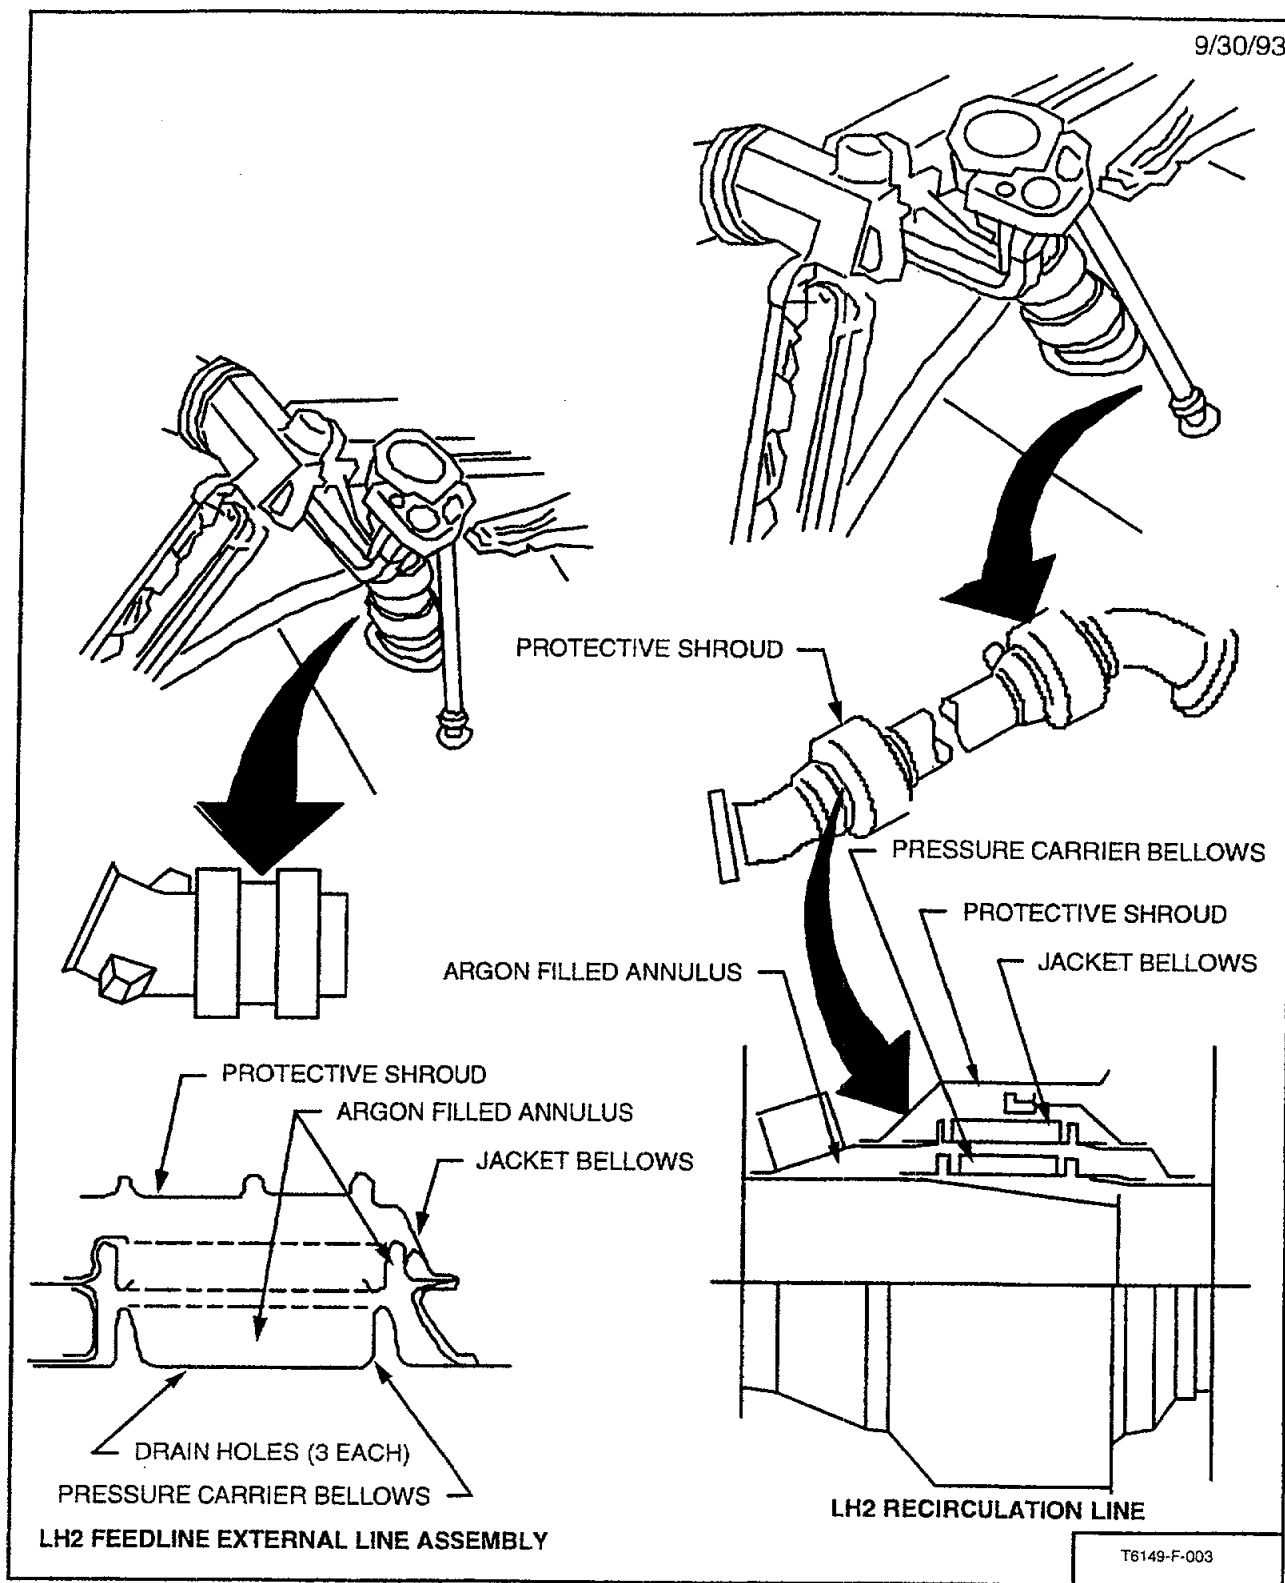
LH2 FEEDLINE EXTERNAL LINE ASSEMBLY AND
